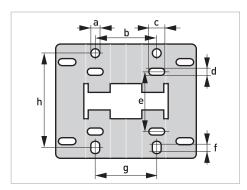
Dimensions of mounting plate of wall-mounted housing
